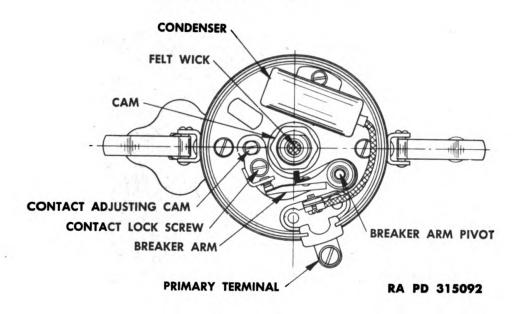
Breaker Plate for IGC 4700 Series Distributors
